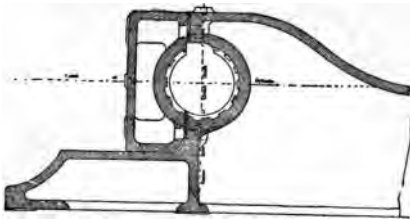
PORTER-HAMILTON, MAIN BEARING.
